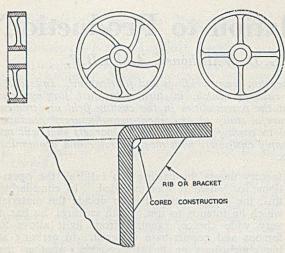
Coring of a Bracket Web and Re-design of Wheel Spokes to Eliminate Casting Stresses
